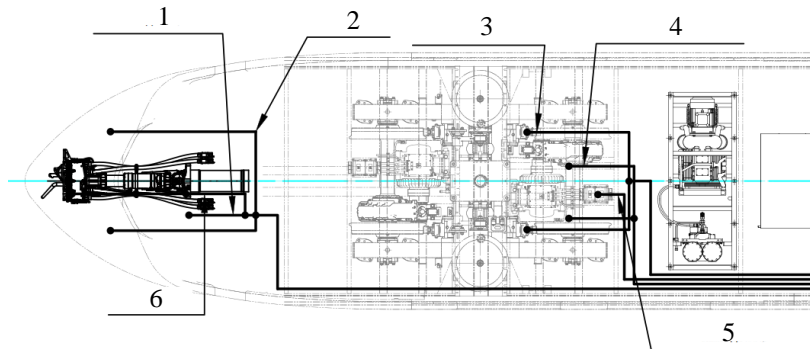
Pneumatic Piping Diagram Design on Motor Engine Combustion (top view)
